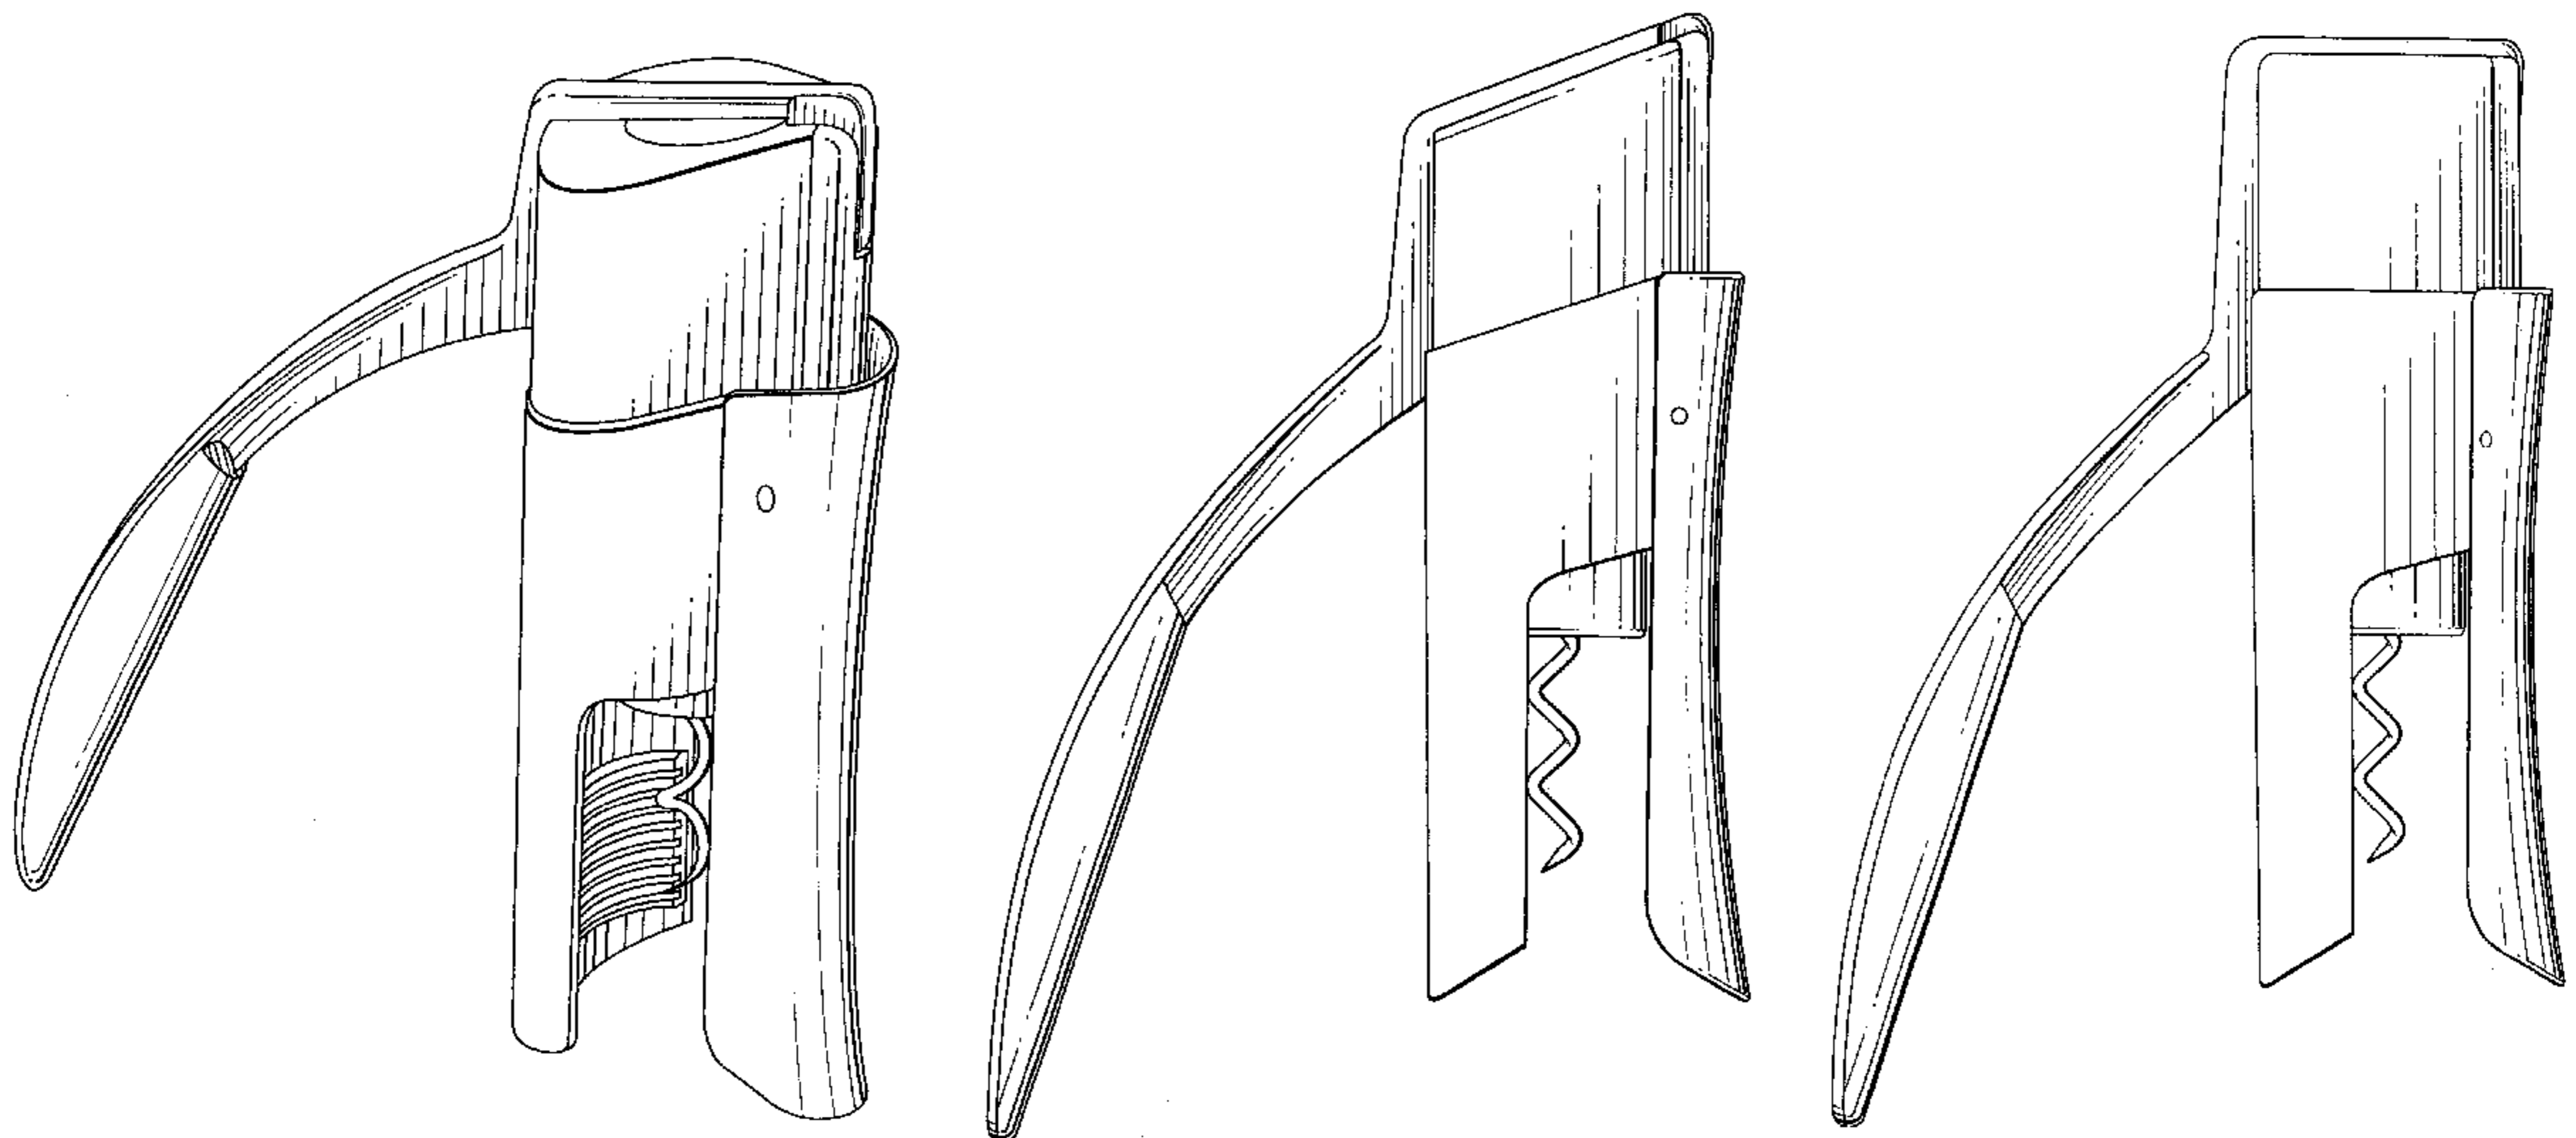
is a front elevational view of the corkscrew of FIG. 8;
